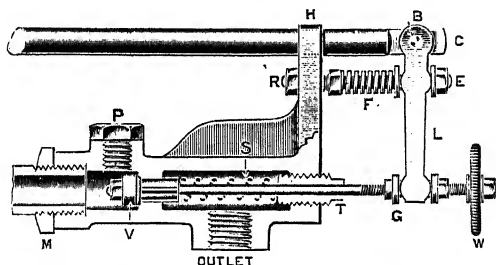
FIG. S.—Valve of the Granger Trap, showing how the valve is balanced.
